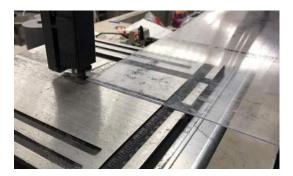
Cutting the sheets with the band saw. Because there isn't a way to clamp the sheet, the cut cannot be straight.
